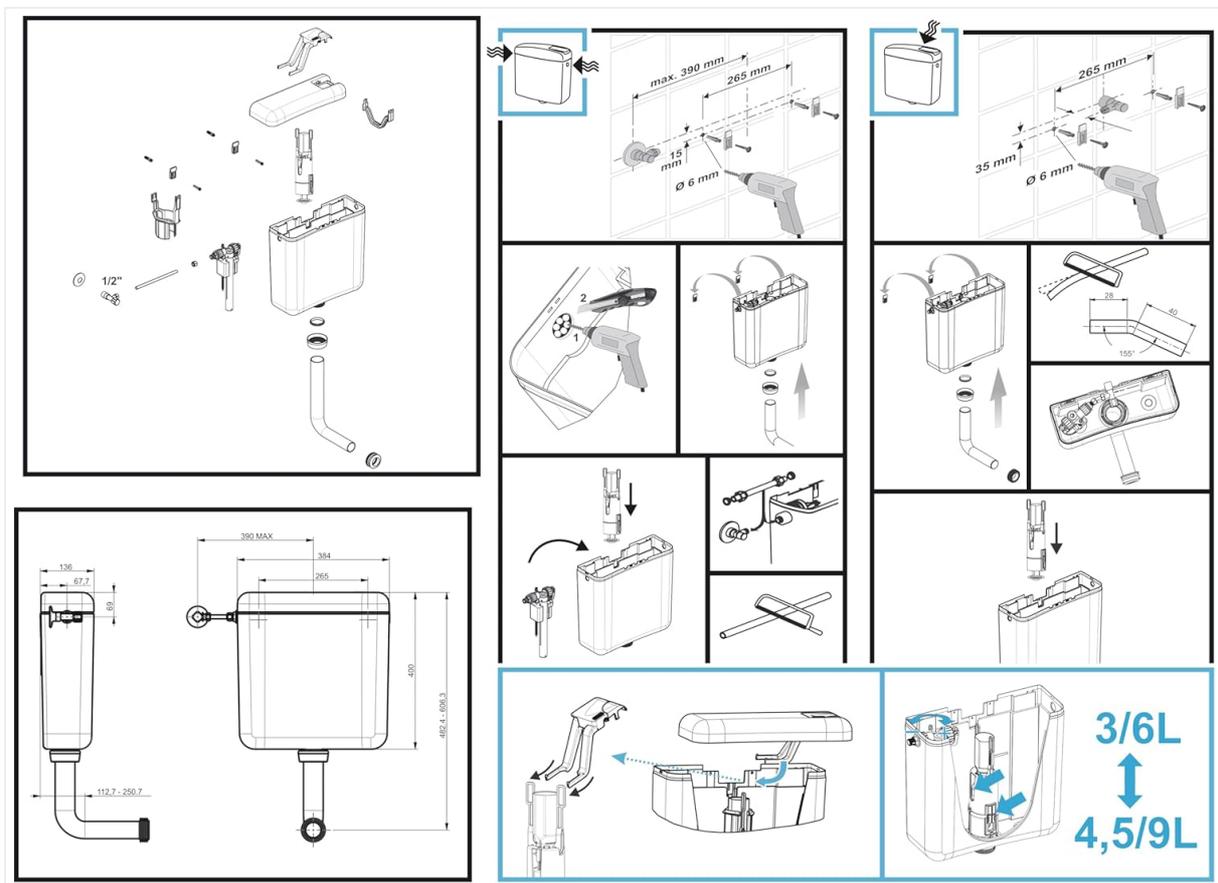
Exploded view of the CORNAT SPK1100 Cistern components and installation steps. This diagram illustrates the various parts and their assembly sequence, including wall mounting, water inlet connection, and flush pipe attachment.
